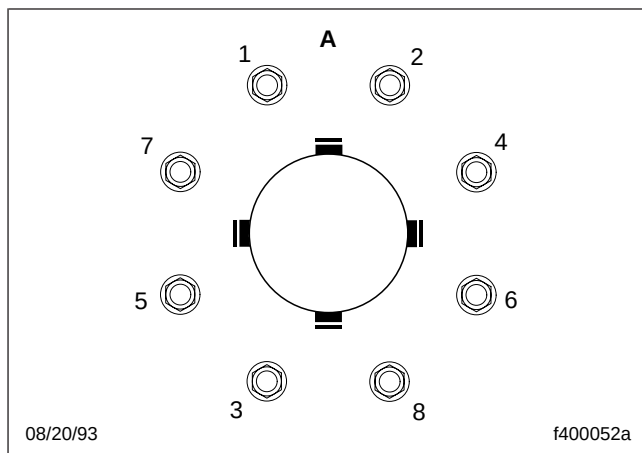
, Tightening Pattern, 8-Hole Wheels
